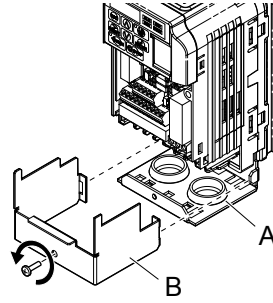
Remove the Terminal Cover on an IP20/NEMA Type 1 Drive
